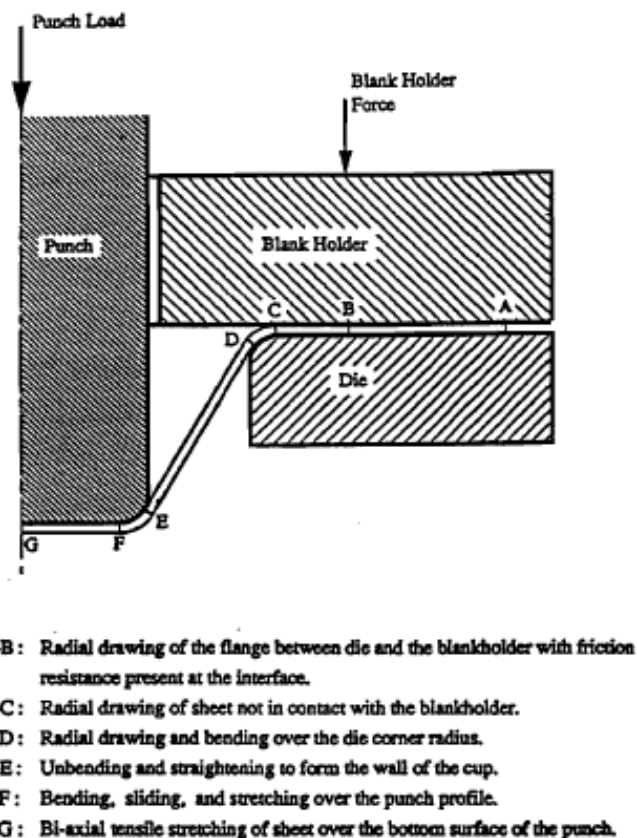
Representation of deep drawing of a cylinder cup using blank holder, [42].
